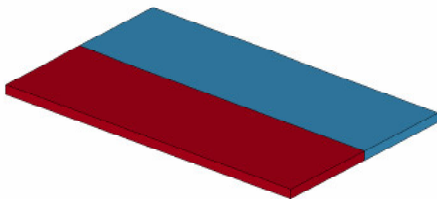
Geometric Model of Two Plates to be Welded
